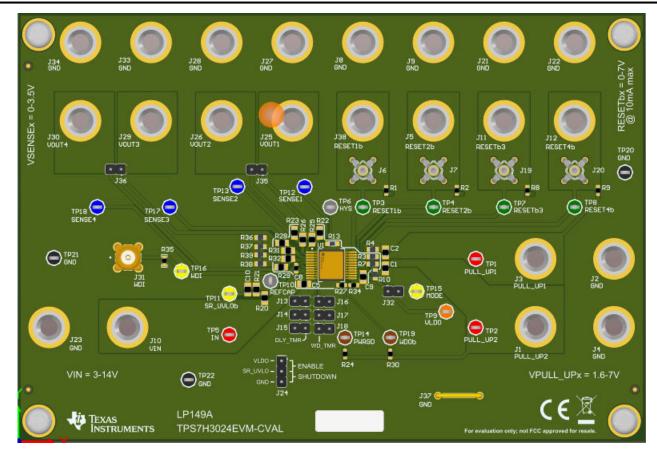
Printed Circuit Board Layout Example: Top Layer 3D View
